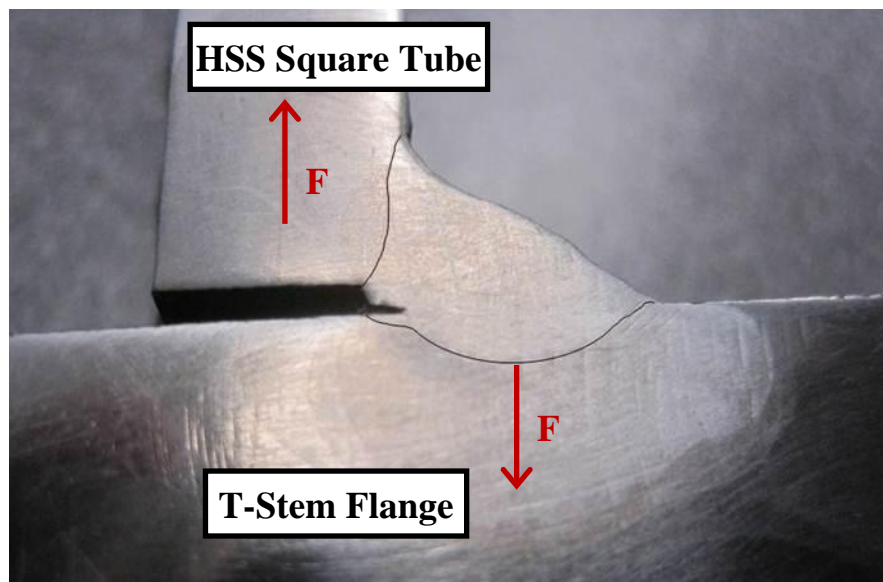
T-stem Connection Weld Eccentricity (with Weld Penetration Enhanced)
